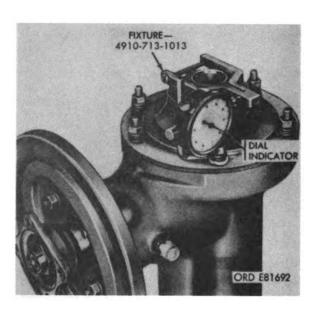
Checking backlash between dive pinion and bevel drive gear.
